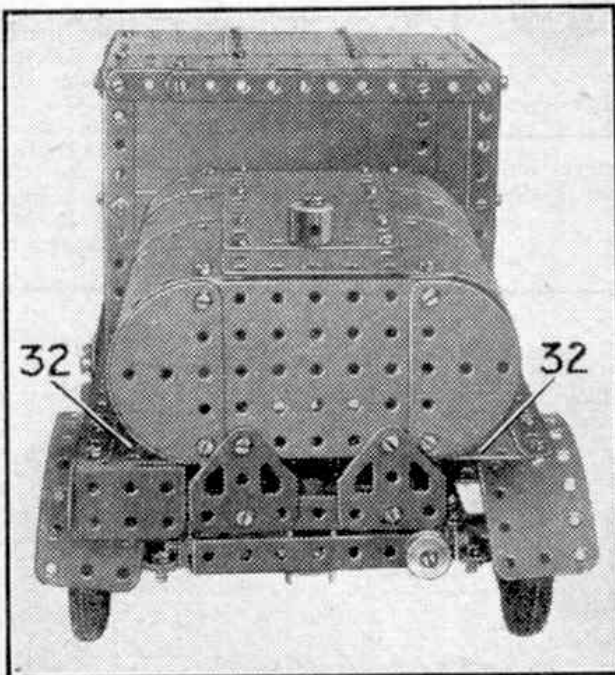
This rear view shows the tank supporting brackets and details of the tank ends.
